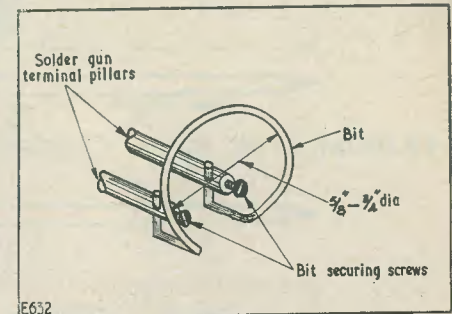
A solder gun bit, shaped as shown here, can prove useful in removing valveholders and similar components from printed circuit boards
